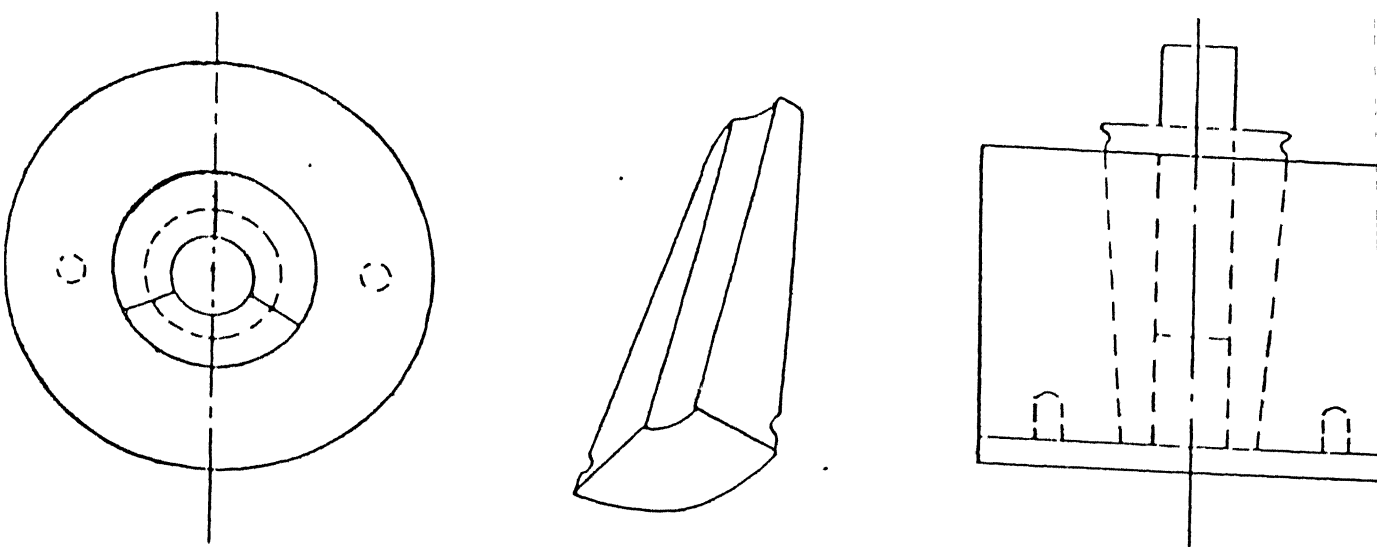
STAINLESS STEEL DIE FOR MAKING PELLETS
